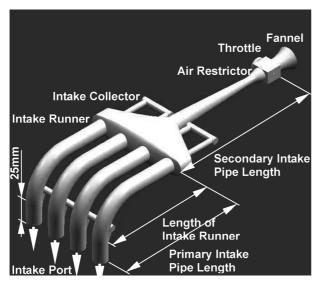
Air Intake System with Removal of Intake Port by Solid 3D-CAD
